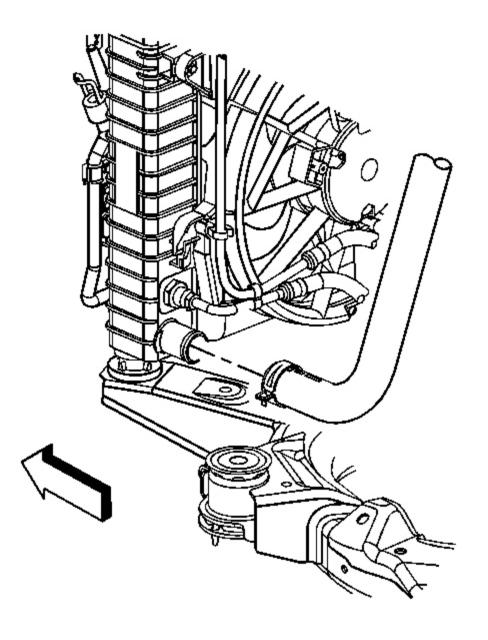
View Of Radiator Outlet Hose Courtesy of GENERAL MOTORS CORP.
